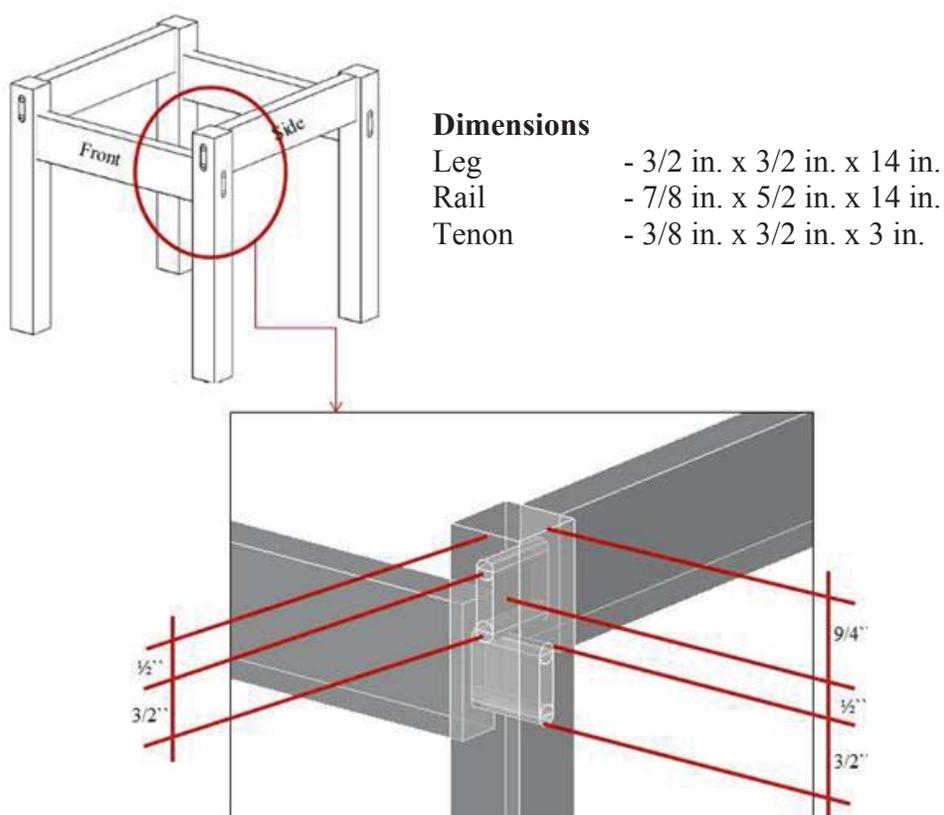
Glued round-shouldered rectangular mortise and tenon joint frame construction configuration.
